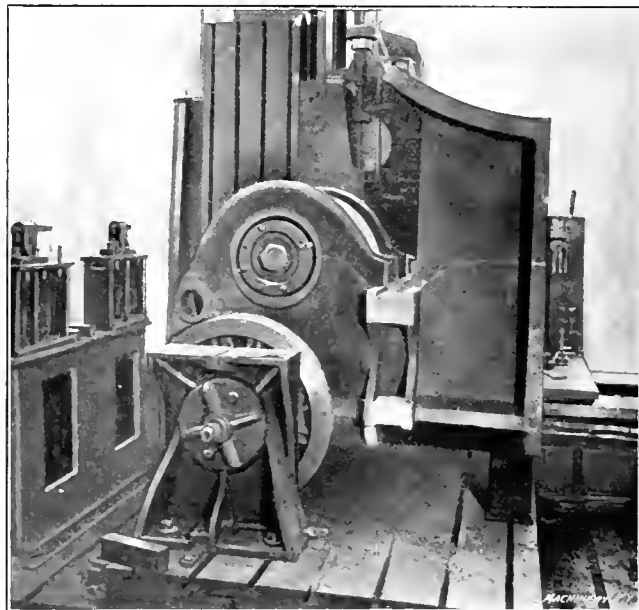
Boring Attachment of the Cylinder Planer in Use
